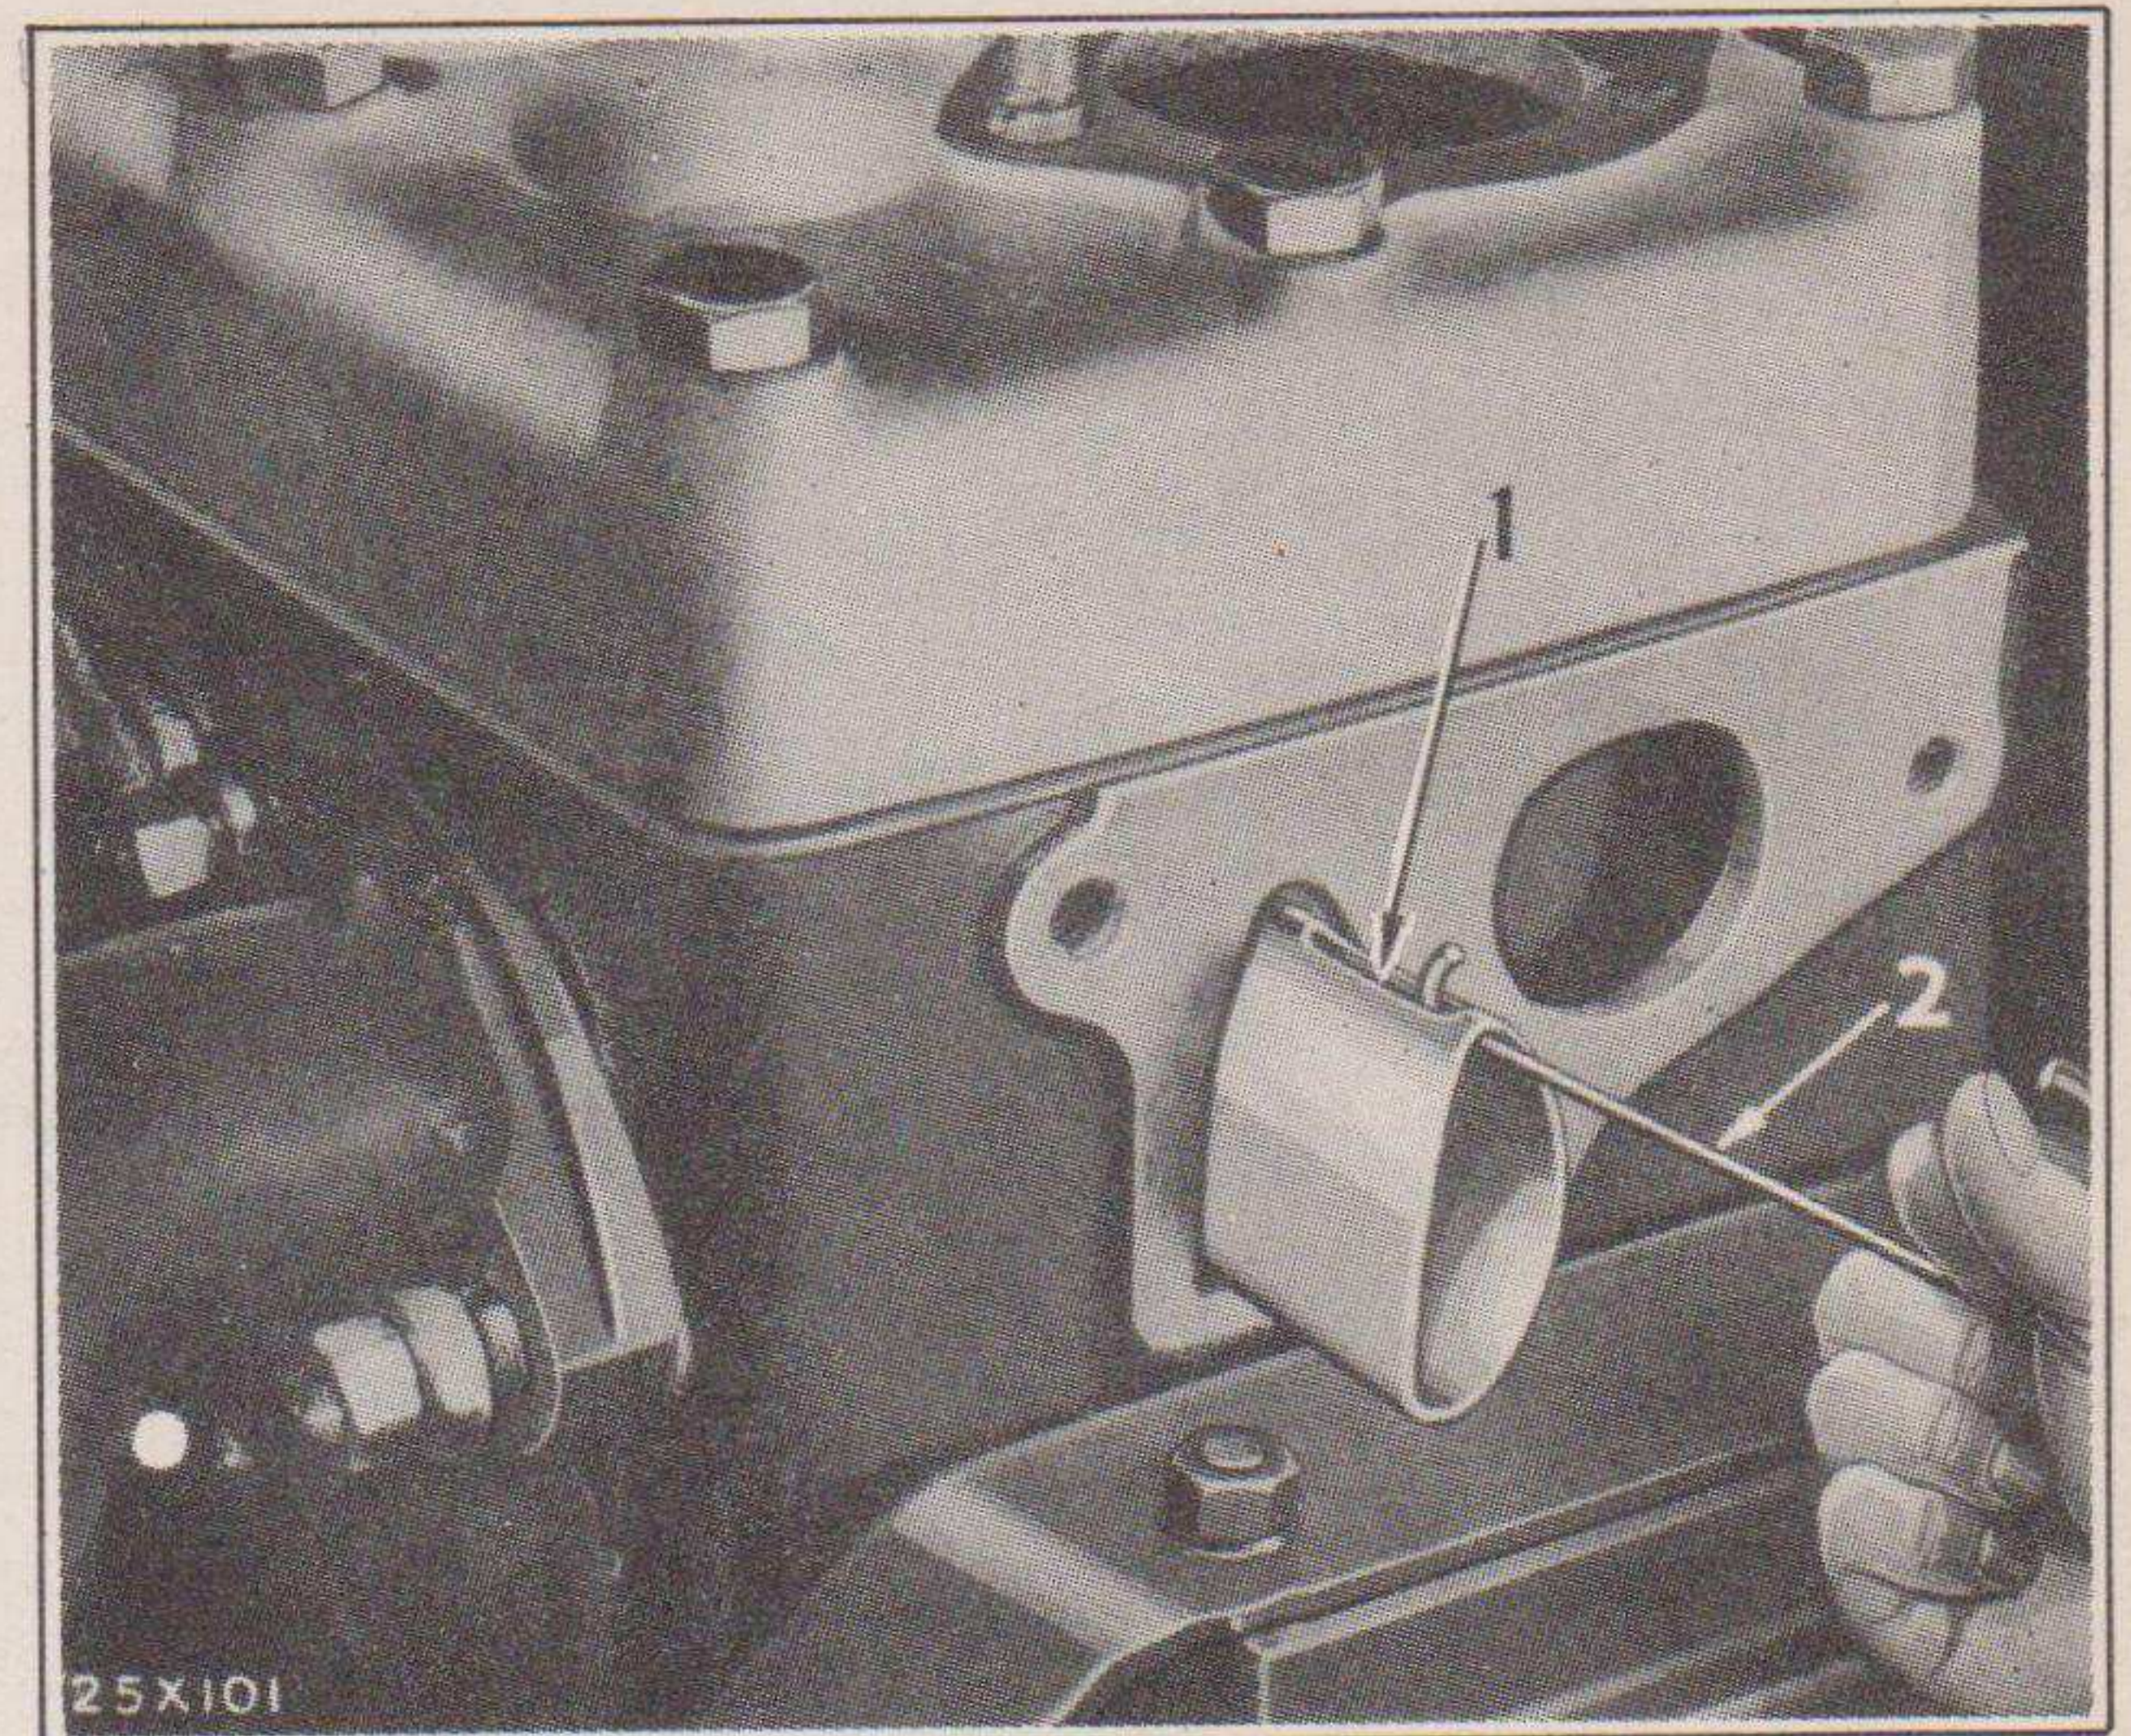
Removing Cylinder Block Water Distributor Tube
